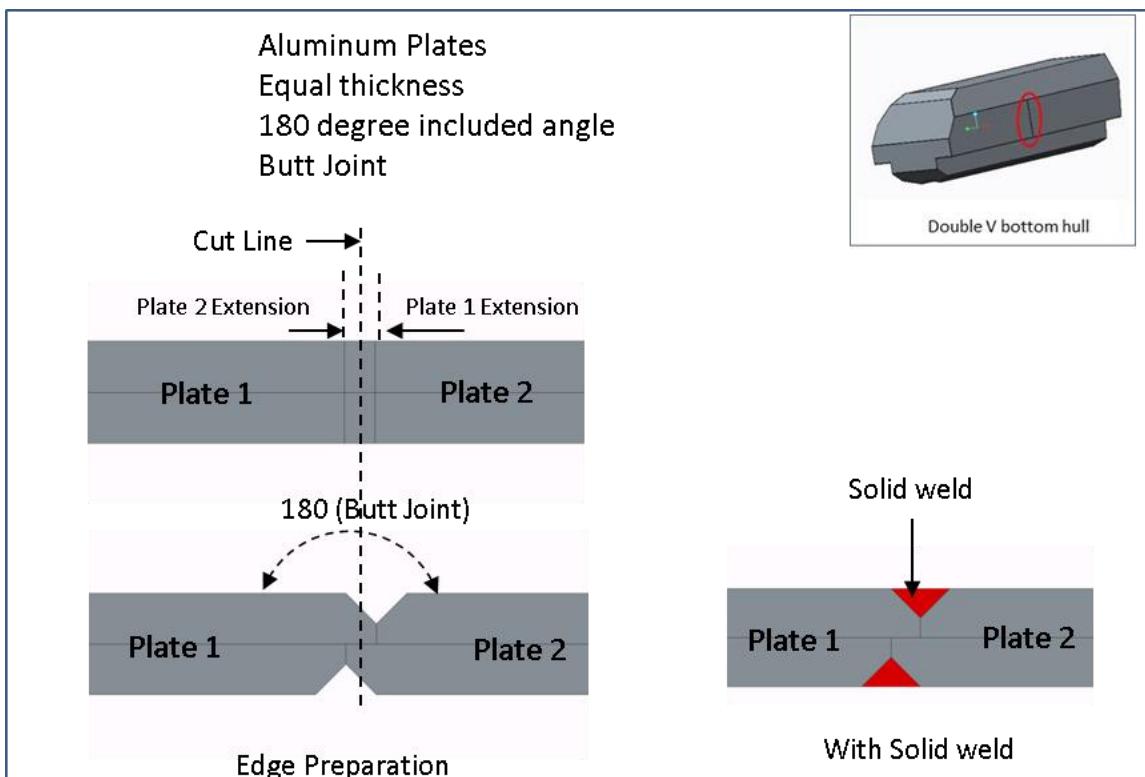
Edge Prep and Solid Weld Example 4
